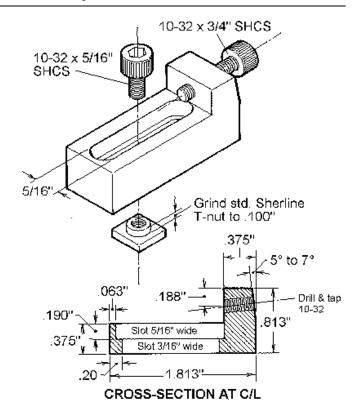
The view above shows the completed clamp and a cross-section at the centerline. The angled hole for the securing screw helps pull the part downward onto the clamp surface. Note that it is drilled perpendicular to the angled surface.
